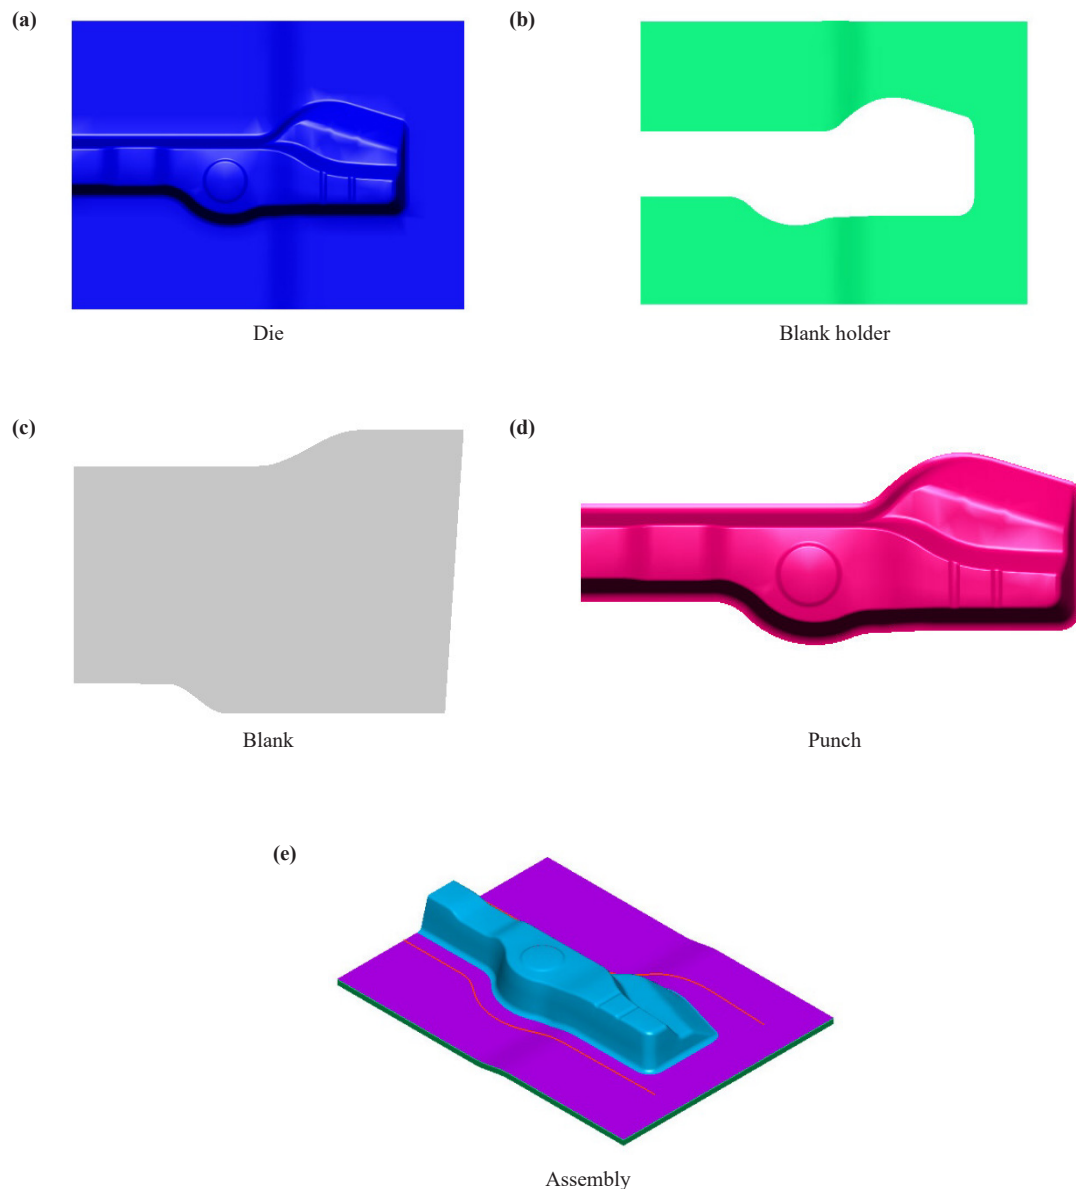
Die, Punch, Blank, Blank holder, and assembly of component used for B-pillar simulation in PAMSTAMP
